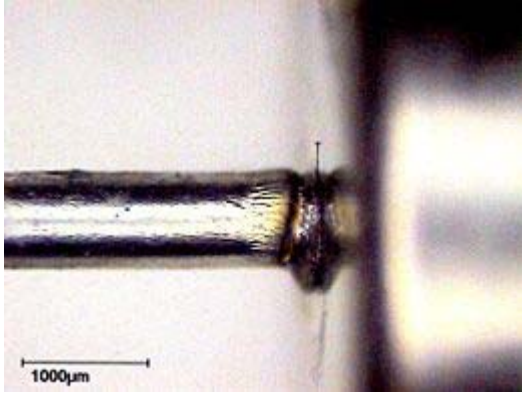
Lead Wire Ø0.8mm, CCS 40, Welding not ok, 4 Bending Cycles; Force Fe is too low, Resistance R becomes too high, Materials get burned
